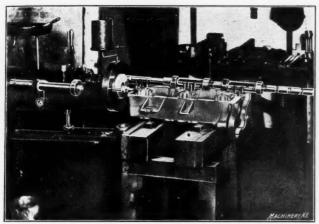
Special Broach for Broaching Crank-shaft Bearings after they are Reamed
